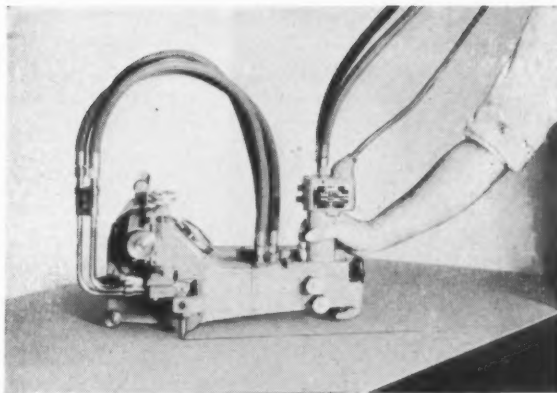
Portability is an asset to this gas cutting machine equipped with direct drive
